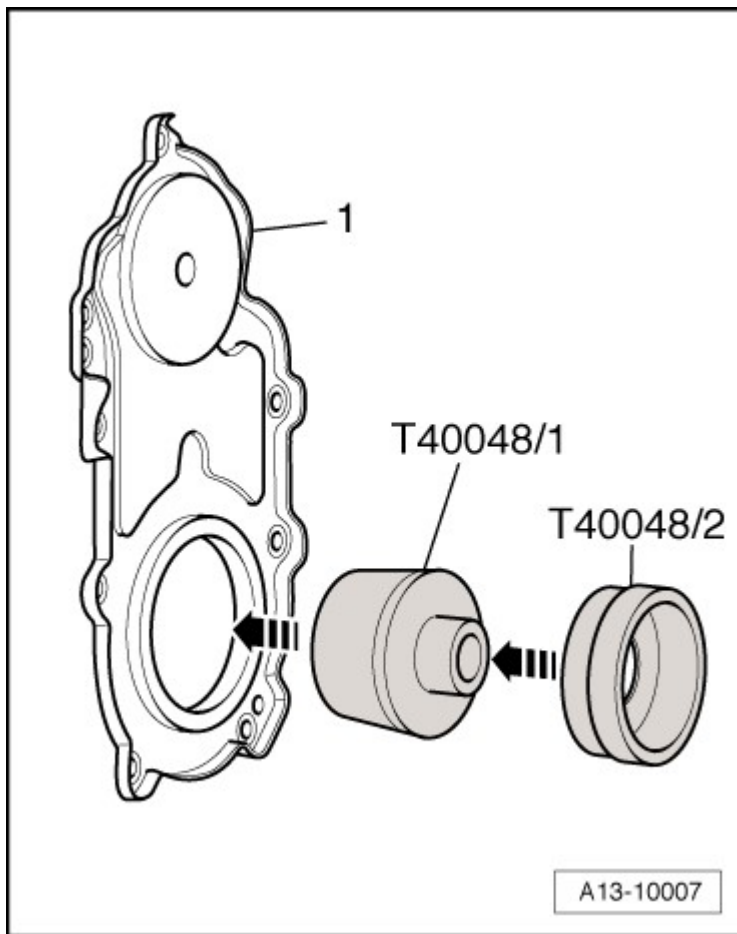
Inserting Assembly Device T40048/1 Onto Pull Sleeve T40048/2 And Sliding Sealing Flange Onto Pull Sleeve
